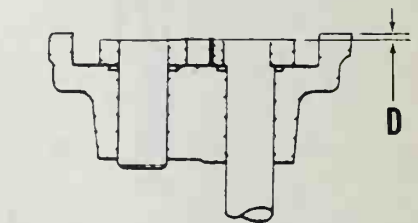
Maximum oil pump gear side clearance (C) is 0.15 mm and maximum gear depth (D) is 0.10 mm.
